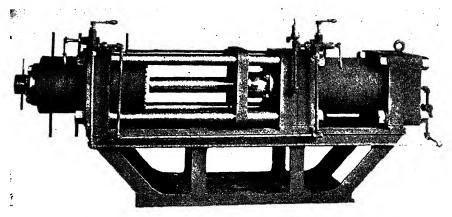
Hydraulic extruding machine. To the material cylinder at left may be attached nozzles to produce rod or tubing of various shapes. Material is kept plastic by means of steam-jacketed cylinder. Nozzle is jacketed for steam or cooling water. This machine is suitable for injection molding of fusible plastics only.
